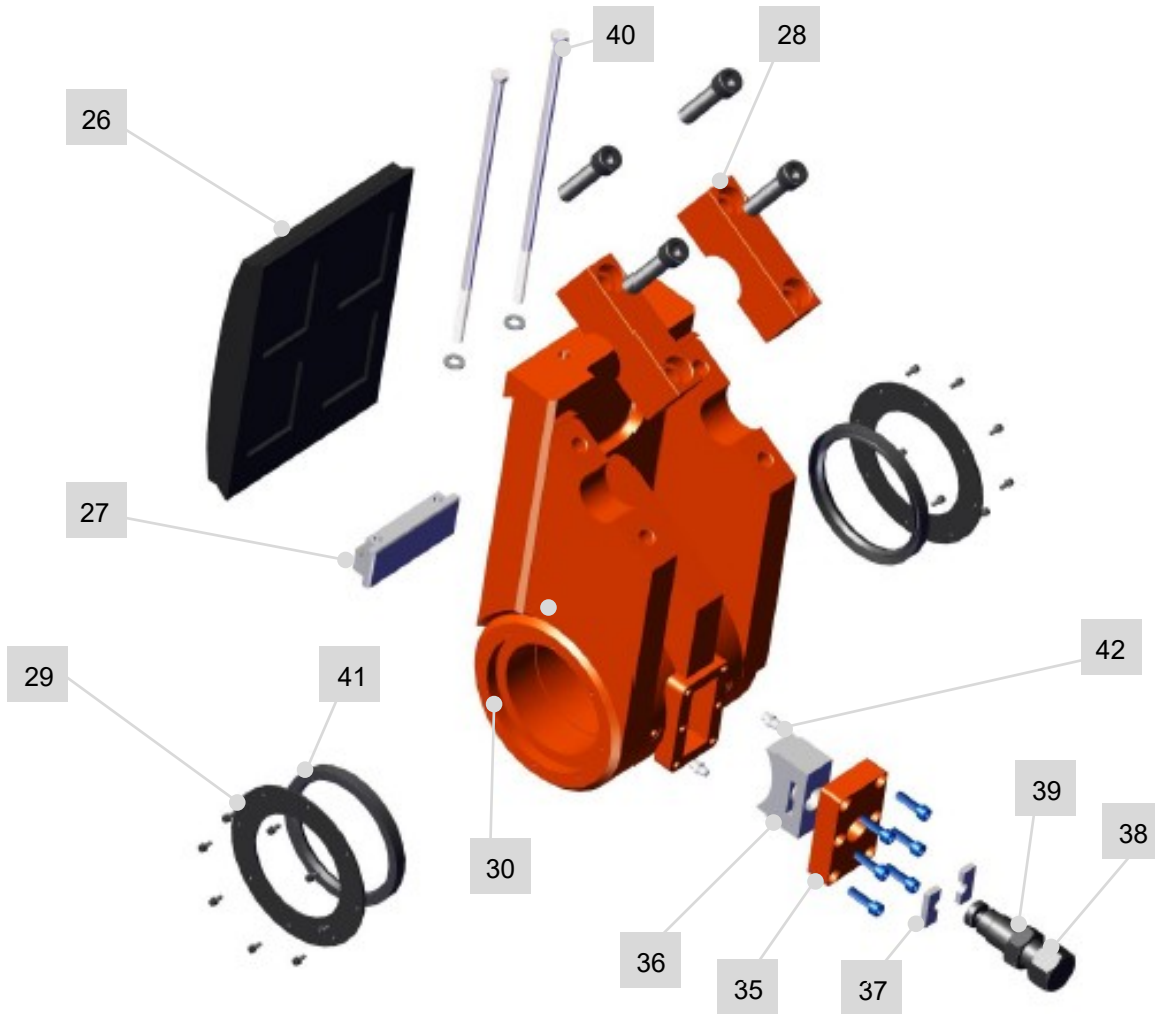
Parts of the LMFC 250 pitman arm assembly.
